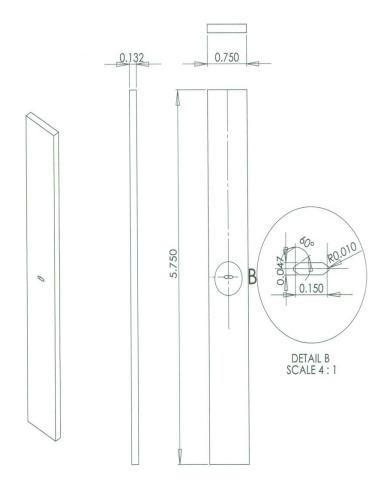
Fatigue Crack Growth Test Specimen Geometry with Notch Details (Courtesy of TRL)
